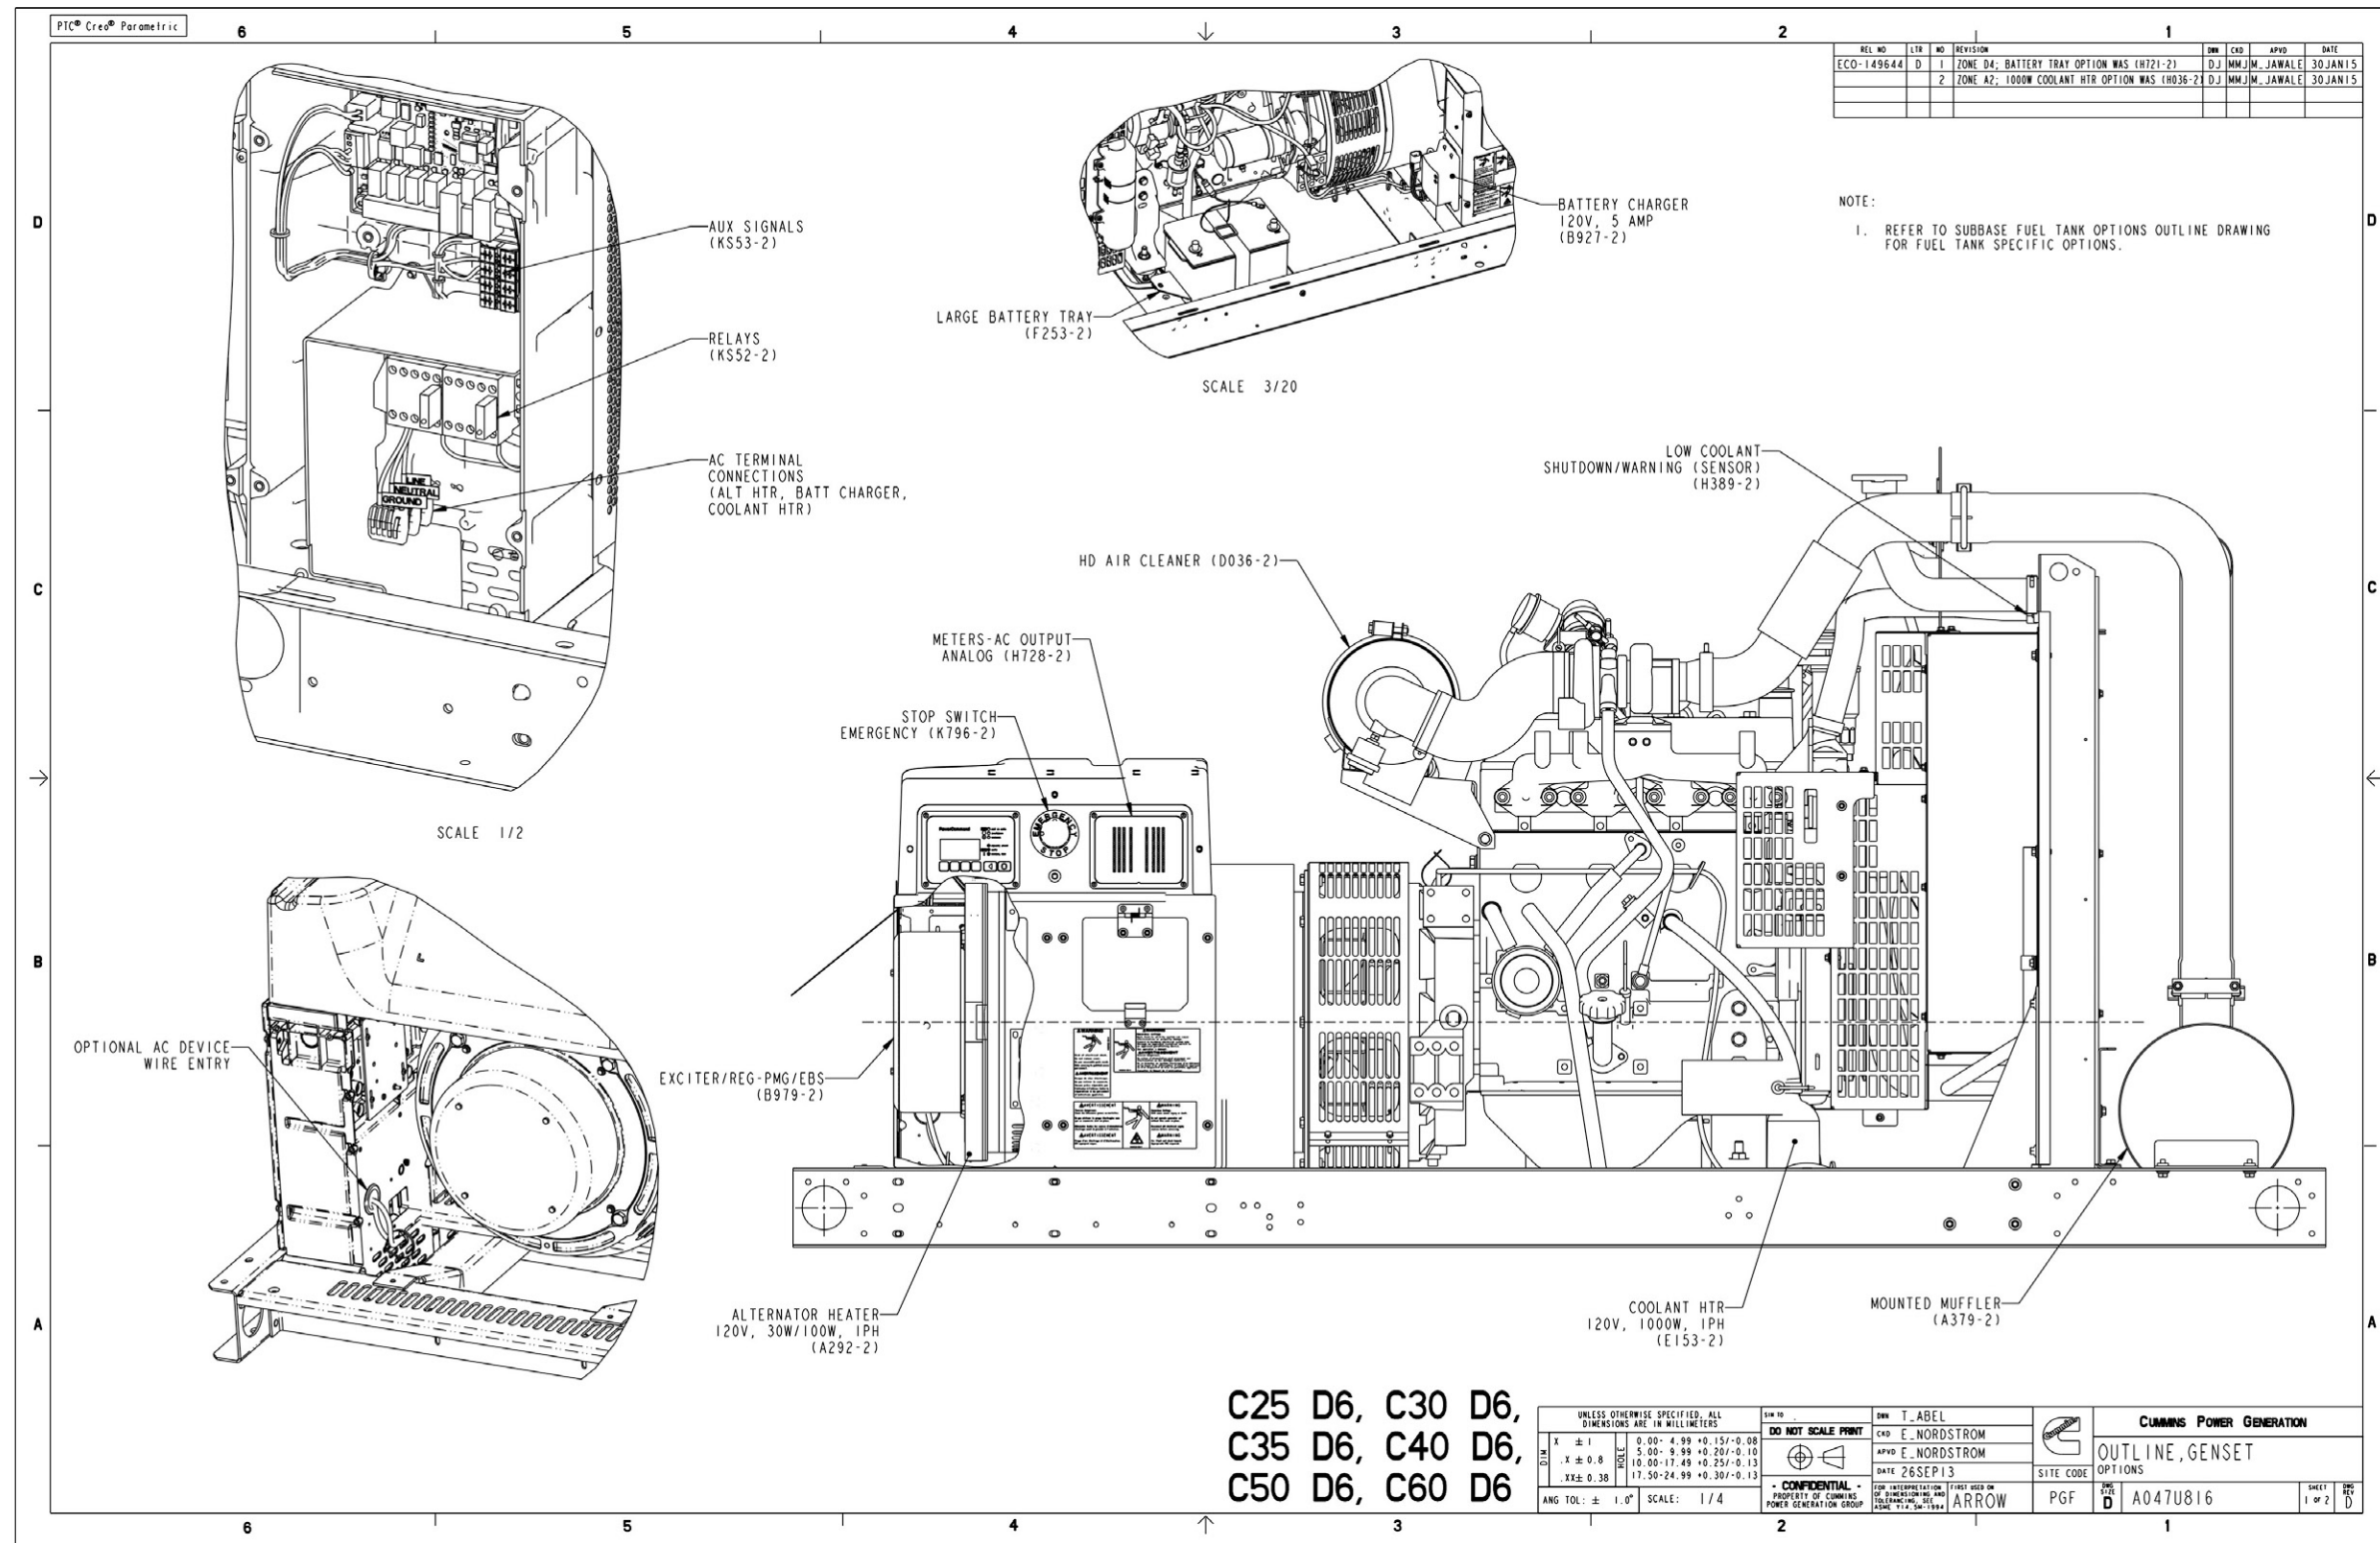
OUTLINE DRAWING (SHEET 1 OF 2)
